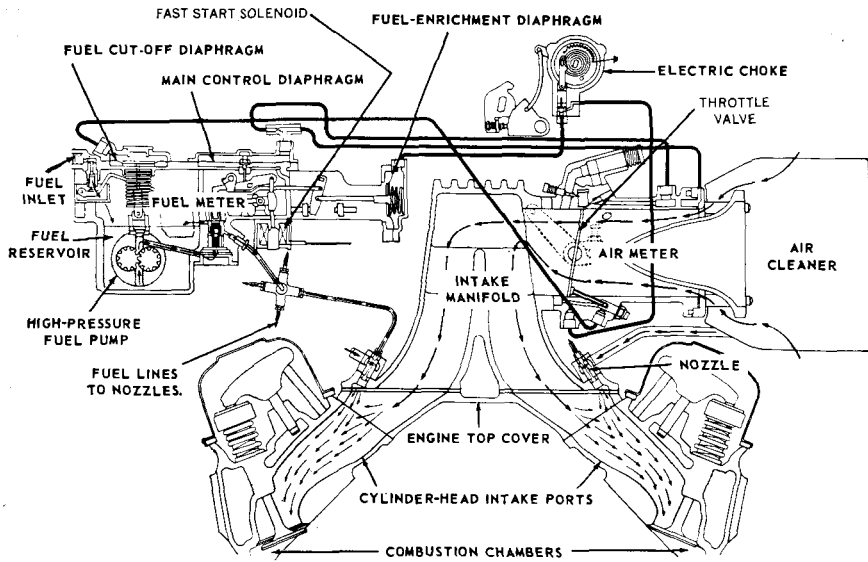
Sectional view of complete fuel-injection system. (Chevrolet Motor Division of General Motors Corporation)
